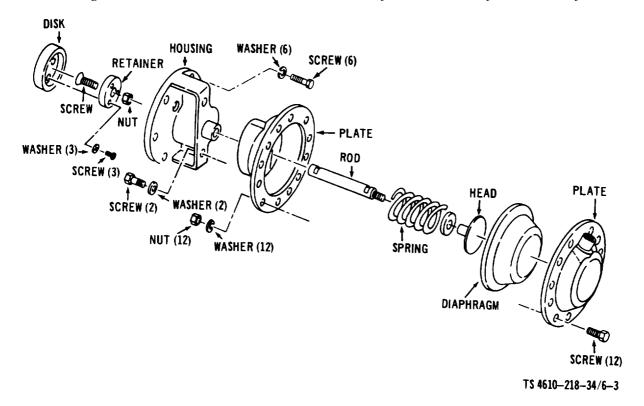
Diatomite Filter Air Release Valve, Disassembly and Reassembly
